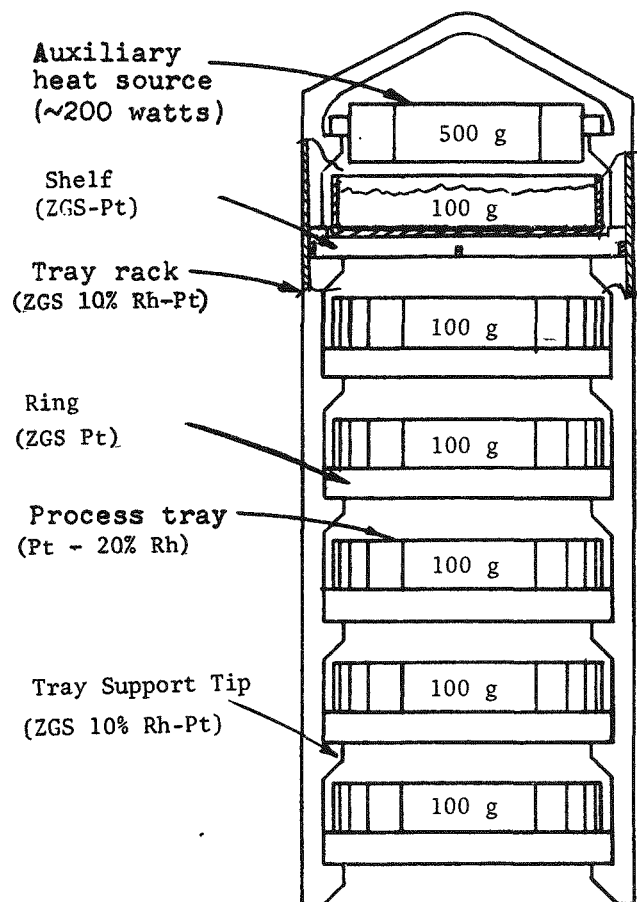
Existing Furnace Rack and Tray Assembly for PuFF Sintering Furnace
